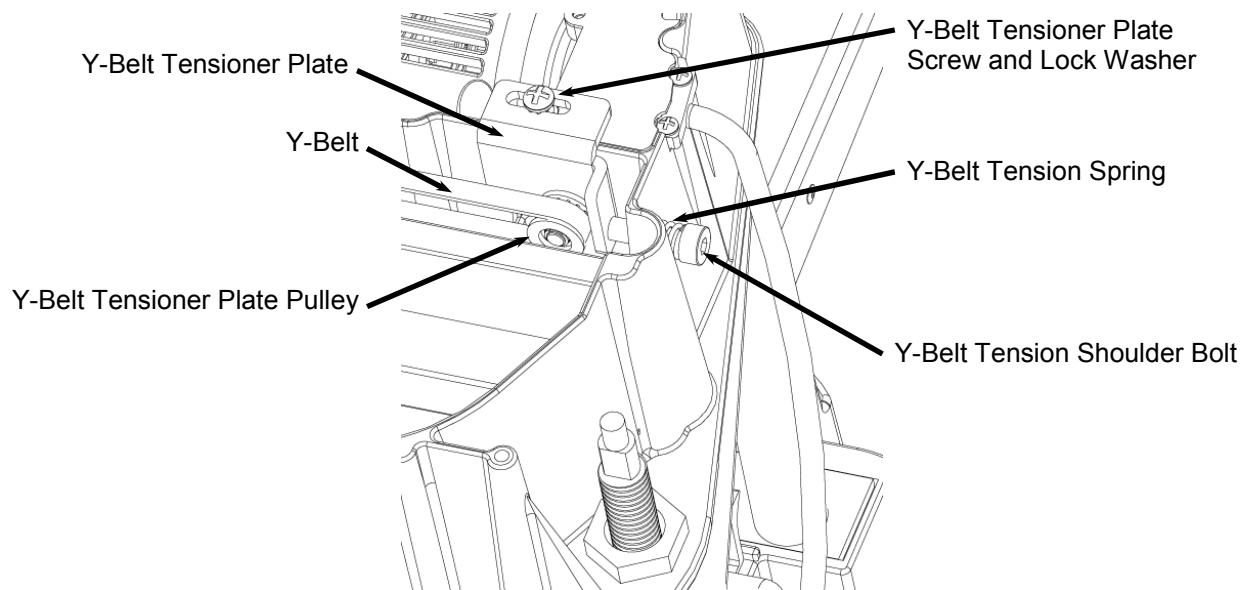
VIEW OF THE Y-BELT TENSIONER PLATE
